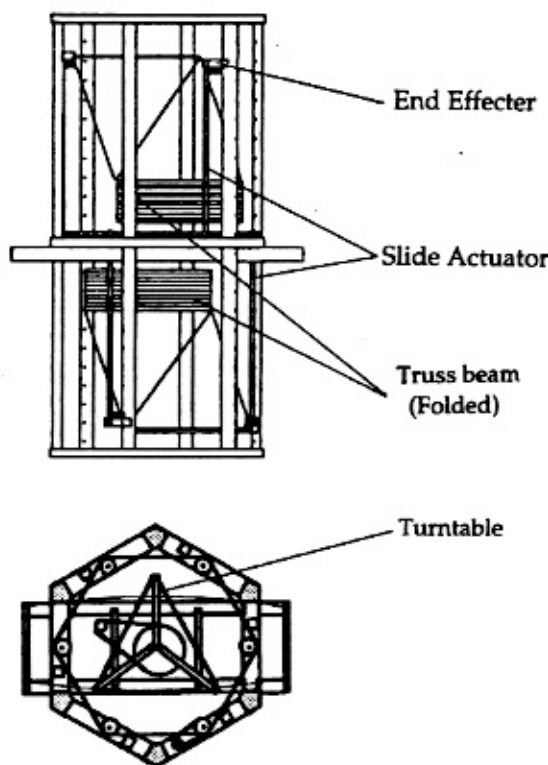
System layout of automatic builder for SPS 2000 truss beam.
